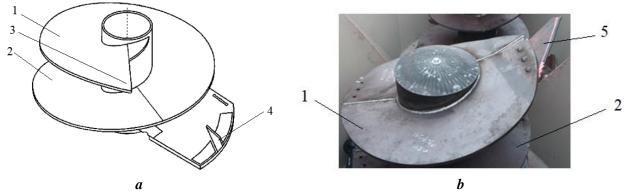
Cylindrical auger by «Supreme International» [8]: 1 – upper flight; 2 – lower flight; 3 – raised edge of the upper flight; 4 – kicker plate; 5 – cutting element
